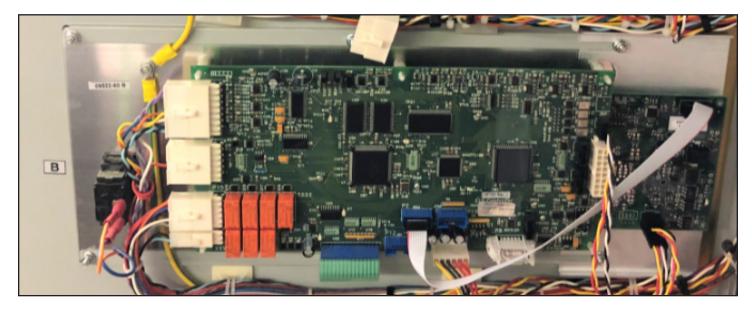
DVS100/DVS150 Channel B Control Board Assembly
